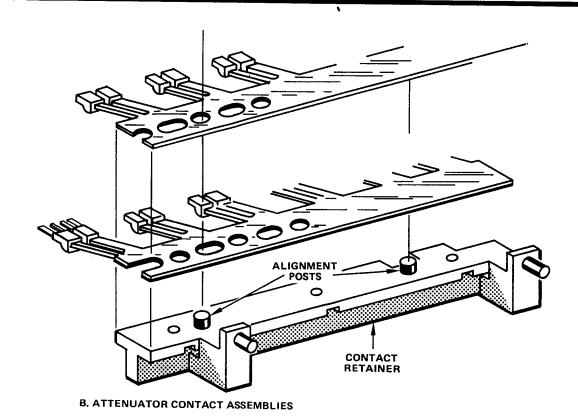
VOLTS/DIV attenuator dissassembly.
